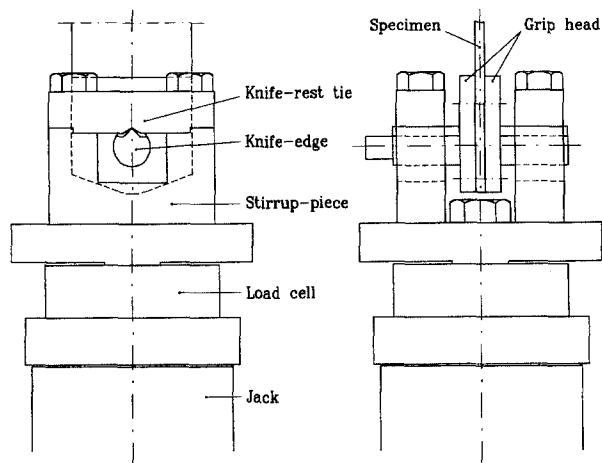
Off-axes testing device for biaxial tensile cruciform specimens
